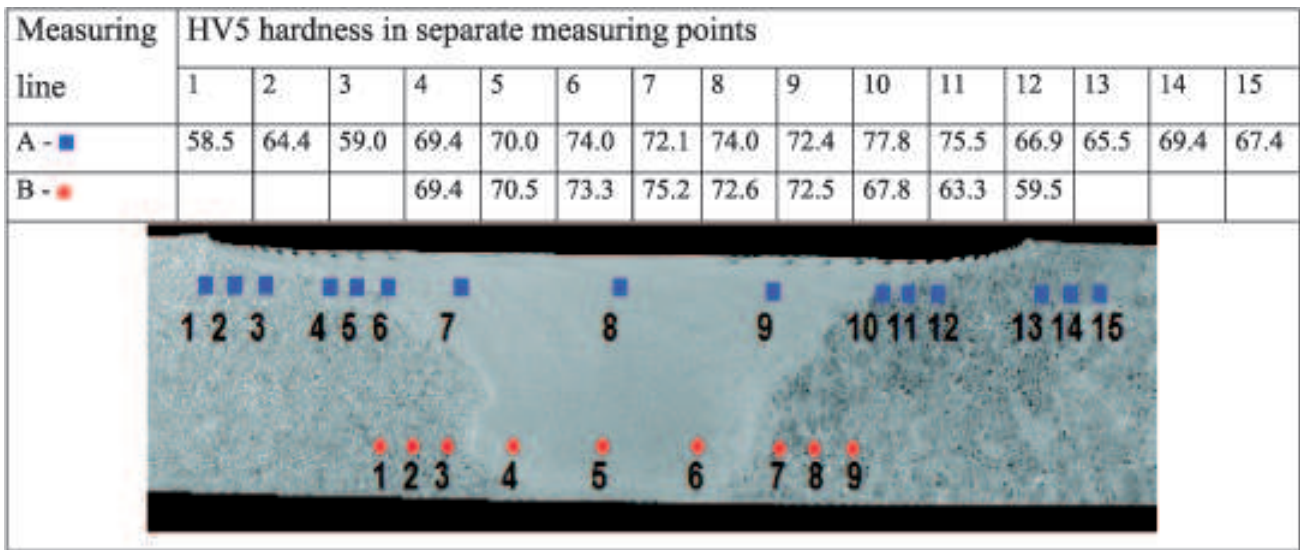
Hardness measurement in sections of FSW joint. Conical tool. Welding parameters – item 2 of Table 1
